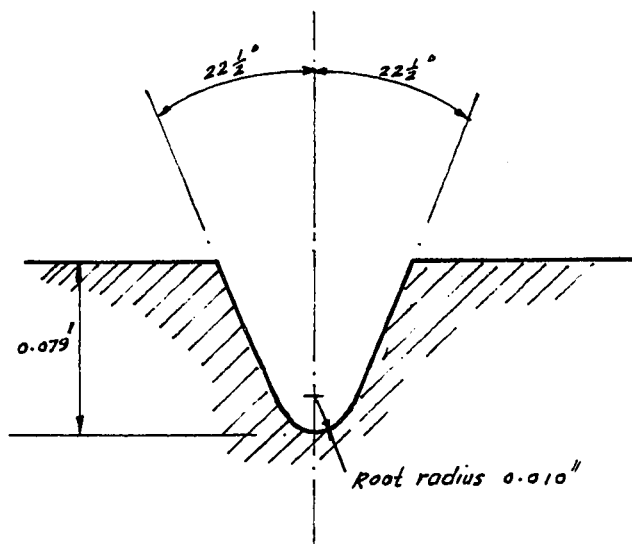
ENLARGED VIEW OF NOTCH FOR TEST SPECIMENS
